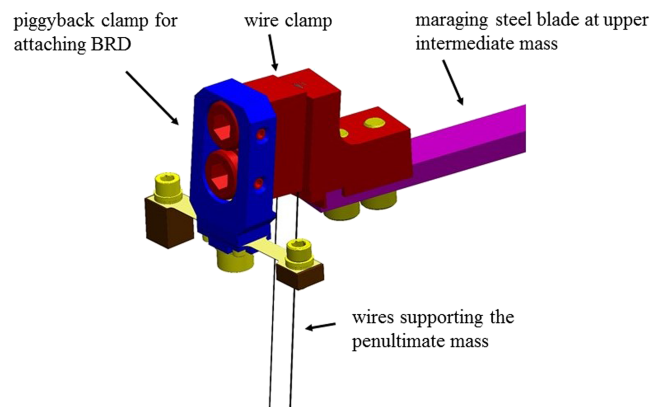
Drawing showing the use of a piggyback clamp for attaching the BRD to the existing wire clamp on the end of the maraging steel blade.
